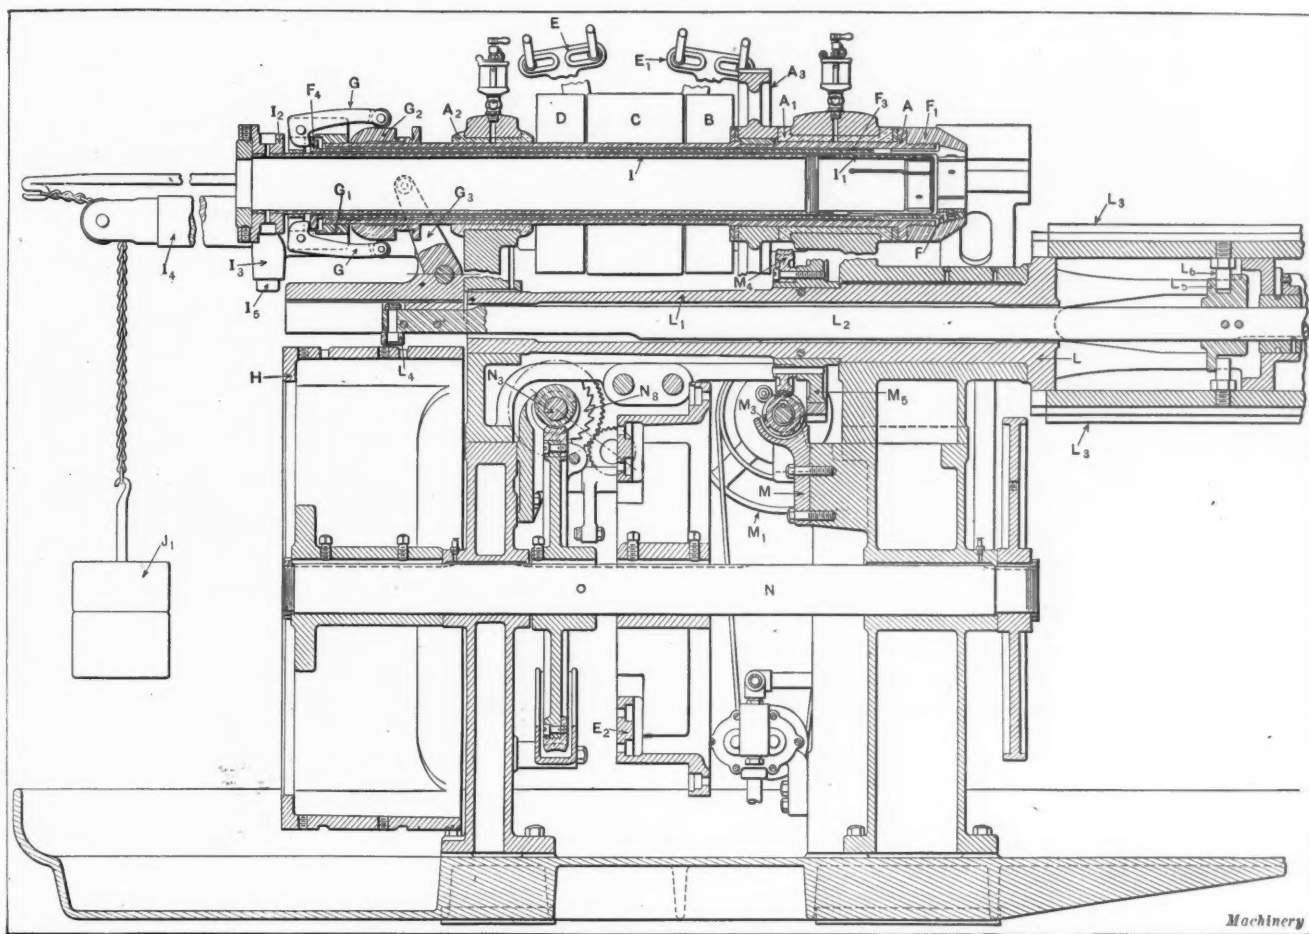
Sectional View taken through Gridley Single-spindle Automatic Turret Lathe, showing Spindle Construction, Turret Construction and Operation of Main Cam-shaft. Note that Turret is swung around out of Correct Position to show Section
